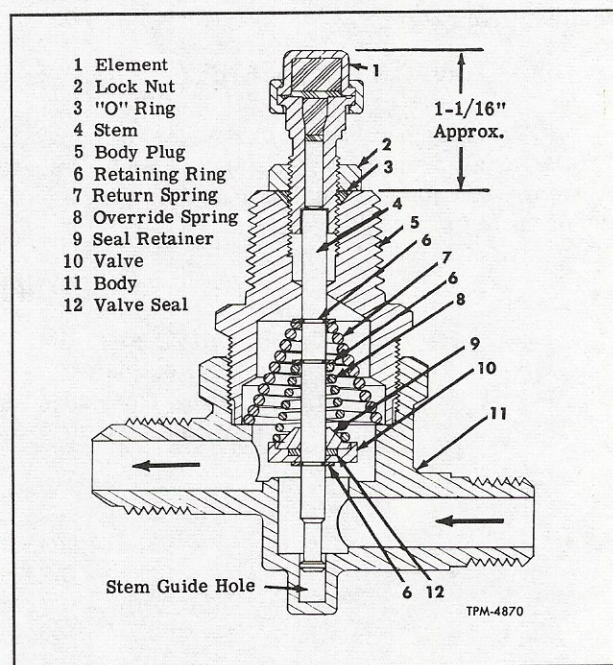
Sectional View of Hydraulic Fan Control Valve (Typical)
